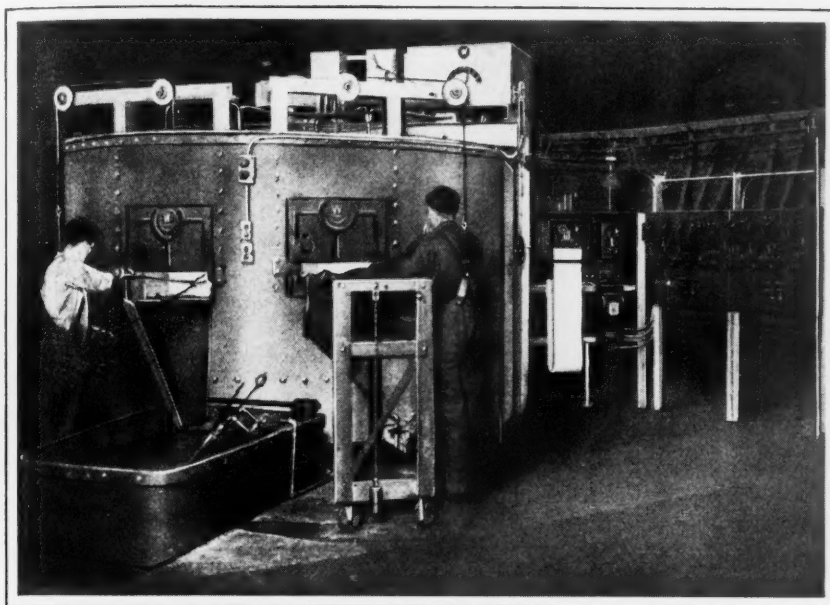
Electric Rotary-hearth Furnace in which Forgings are Uniformly Heated for Hardening
